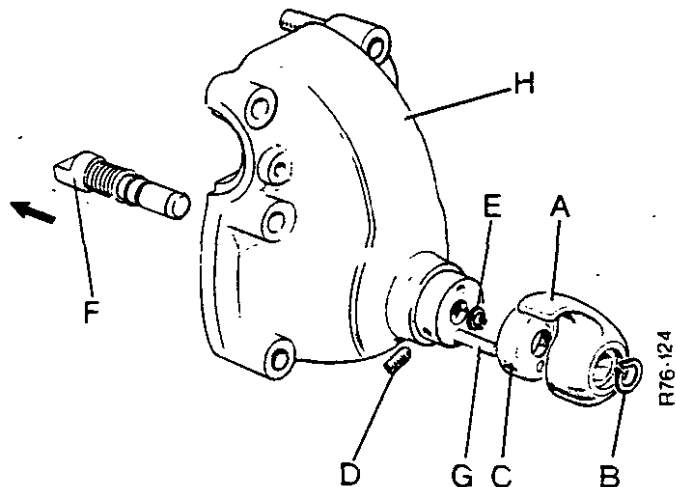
DISASSEMBLY OF THE LOCKING LATCH
